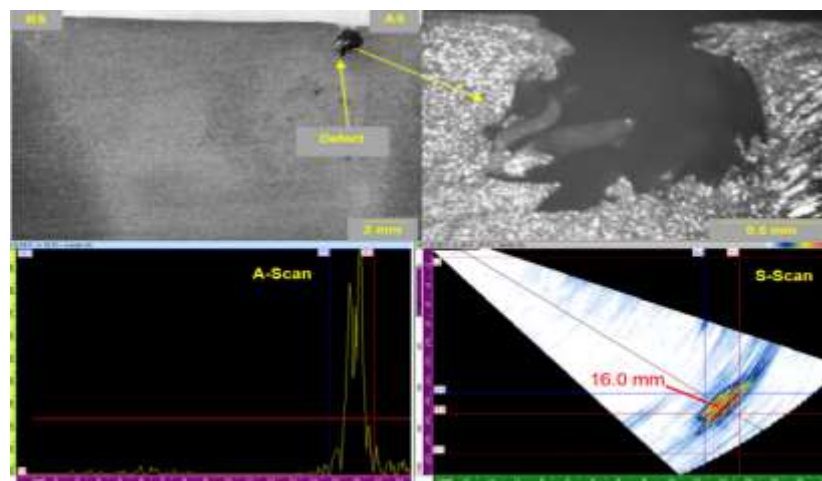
Optical image of cross-section, enlarged defect image, PAUT A-Scan and S-Scan image (second leg) of FS welded panel with surface cavity (Observed by Second Leg).
